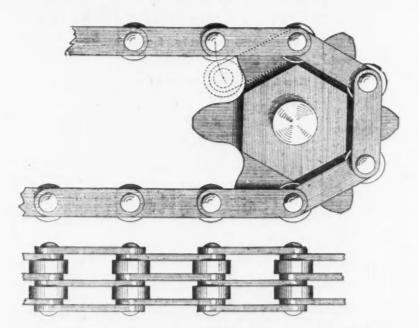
Detail of the Sprocket Wheel and Chain Employed to Drive the Cutter Bar.
